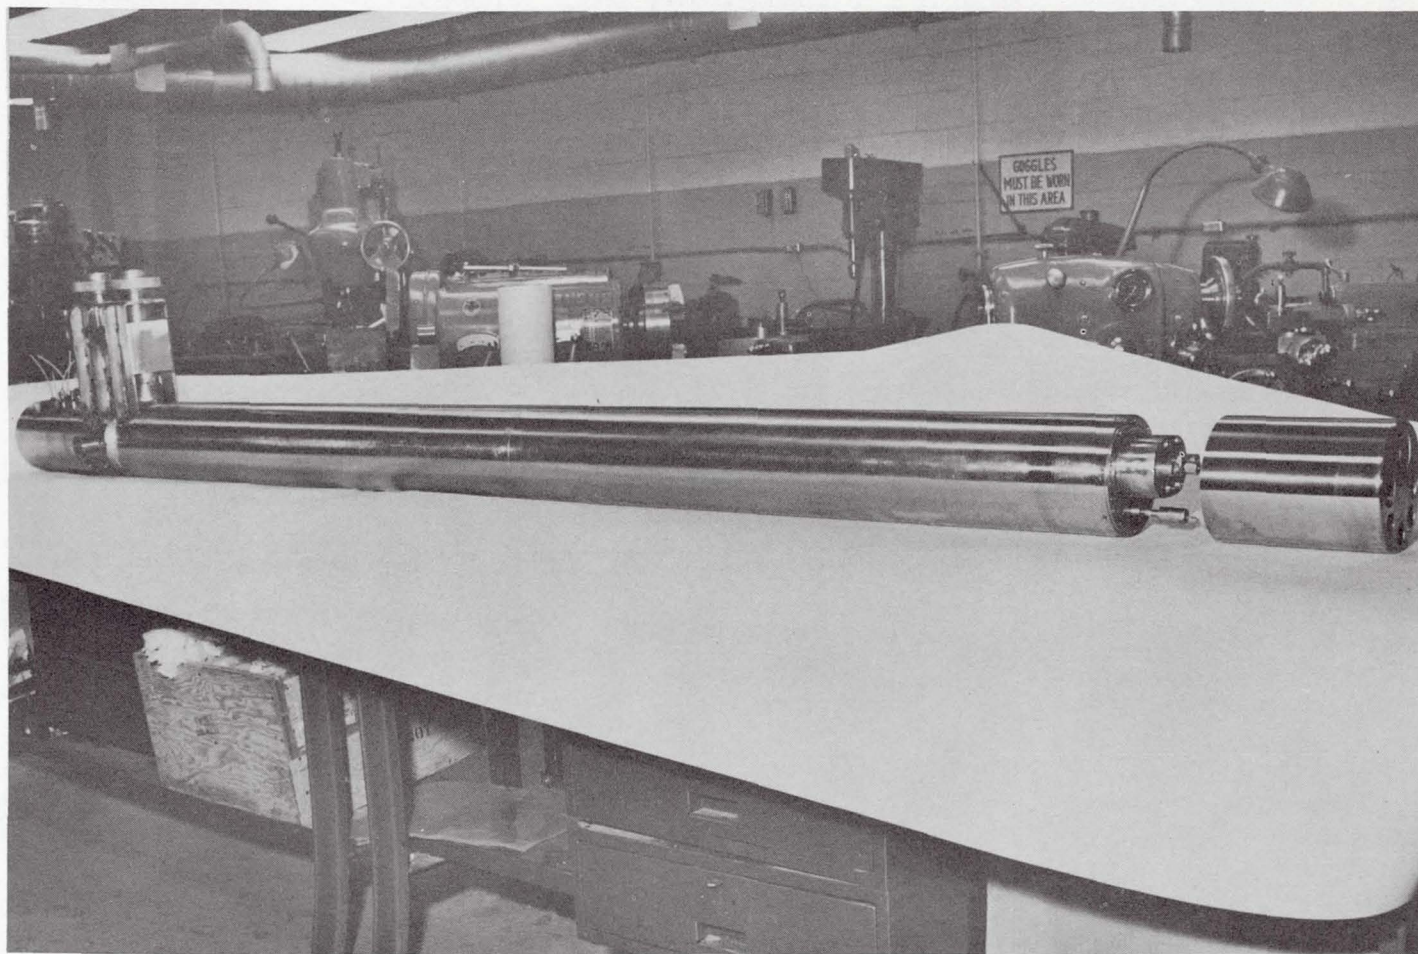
TEST LOOP, HEAD ASSEMBLY REMOVED
